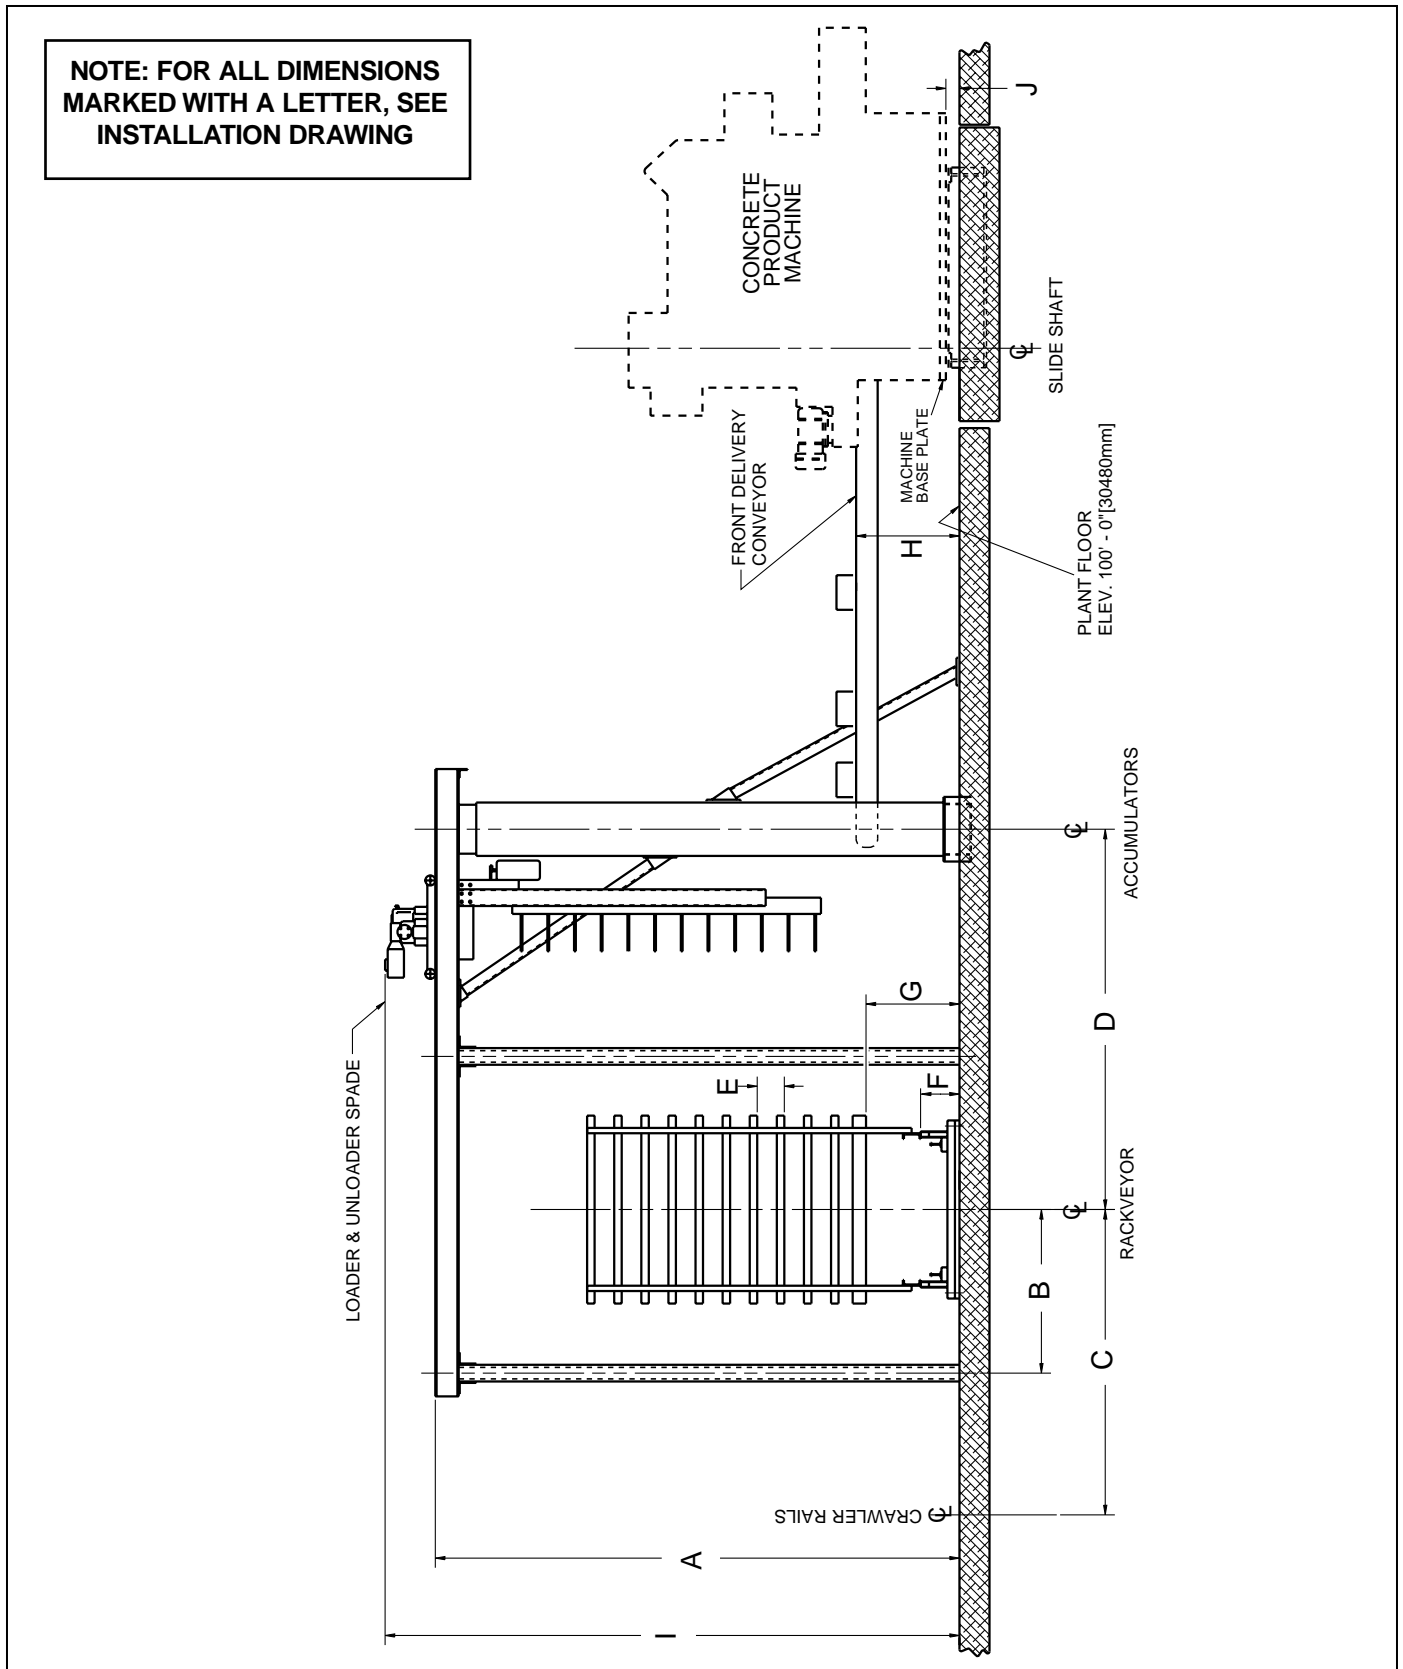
OVERALL INSTALLATION DRAWING (ELEVATION VIEW).
